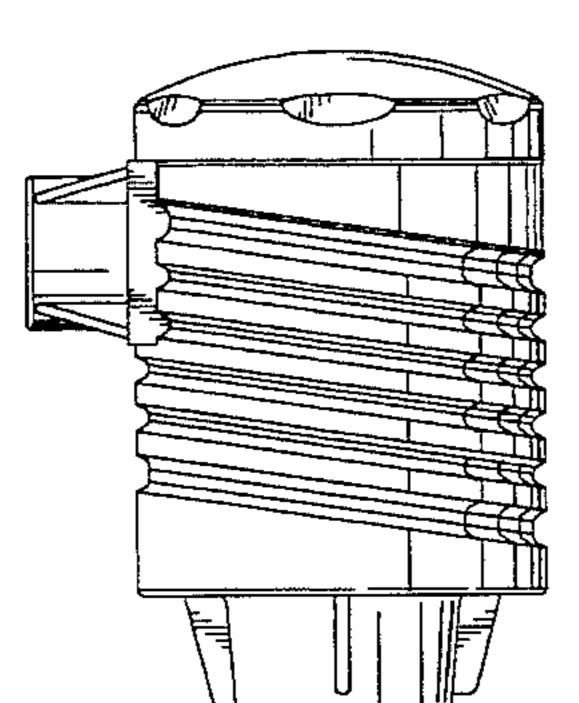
is a left side elevational view of the controller electronics enclosure for liquid handling equipment embodiment of FIG. 6, which is a mirror image of the right side elevational view thereof; and,
